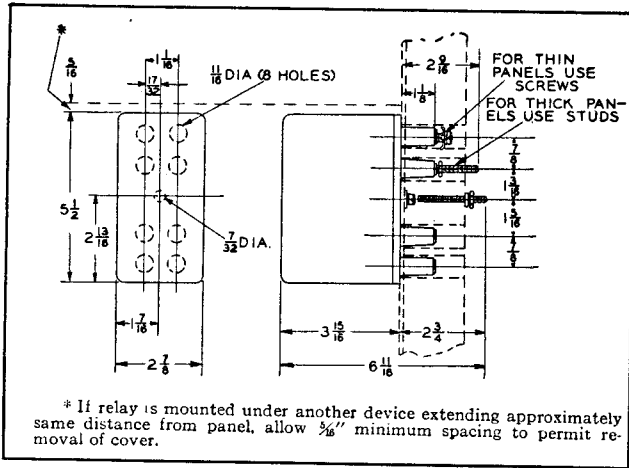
Outline and Drilling Plan for the Closed Type SG Auxiliary Relay. For Reference Only.
